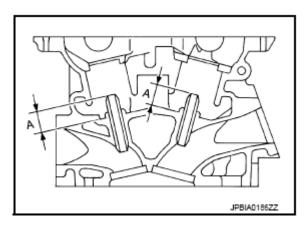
Identifying Valve Guide Press Dimensions Courtesy of NISSAN NORTH AMERICA, INC.
